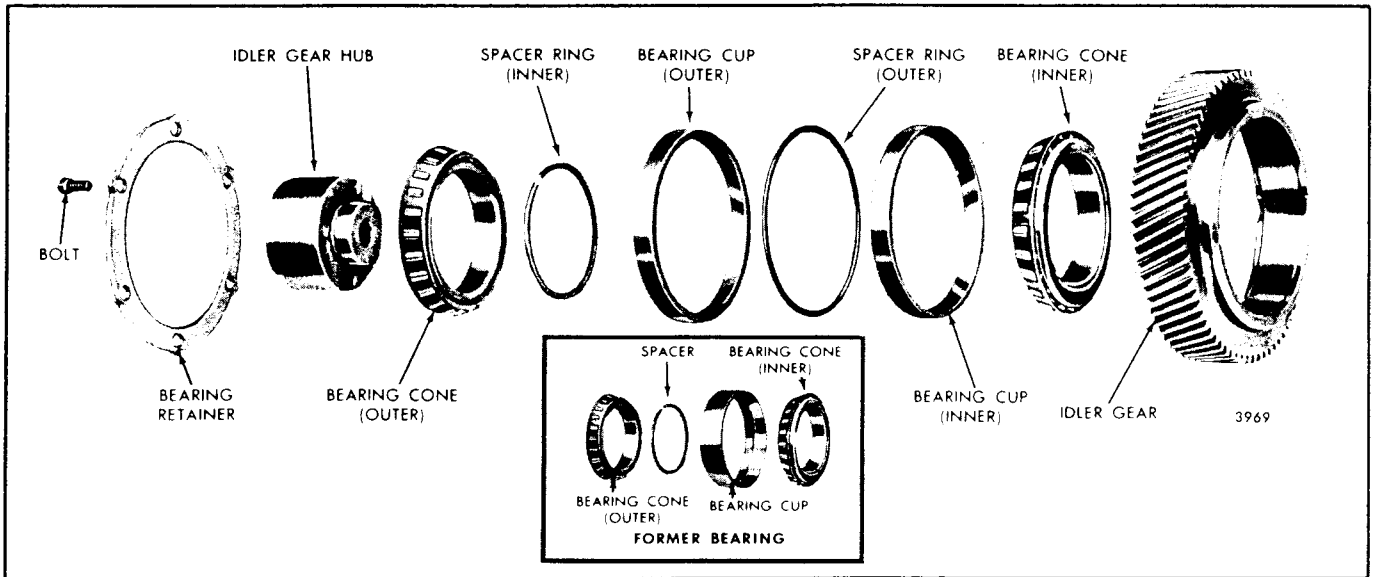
Idler Gear Details and Relative Location of Parts (Current Bearing)
